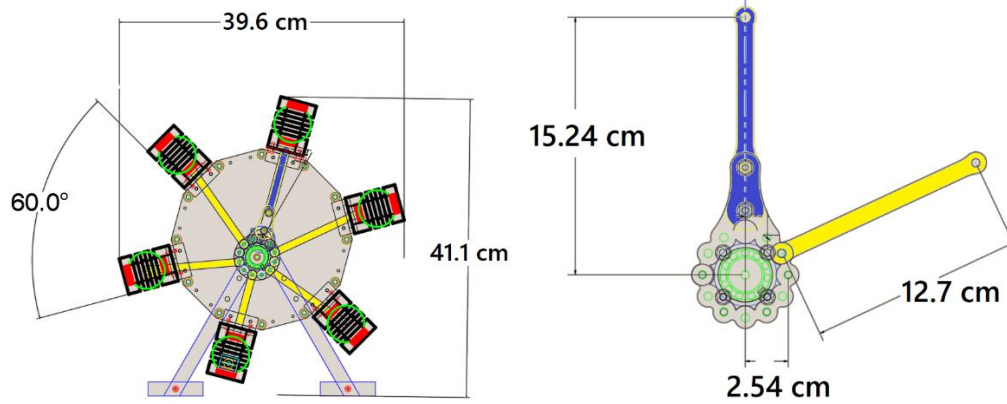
CAD drawings. Left: Full assembly showing the planned angle between each cylinder. Right: Enhanced view of how the blue arm for cylinder A is fixed in its connection to the crank portion and how all the yellow arms have a point of rotation for their connection to the crank portion.
